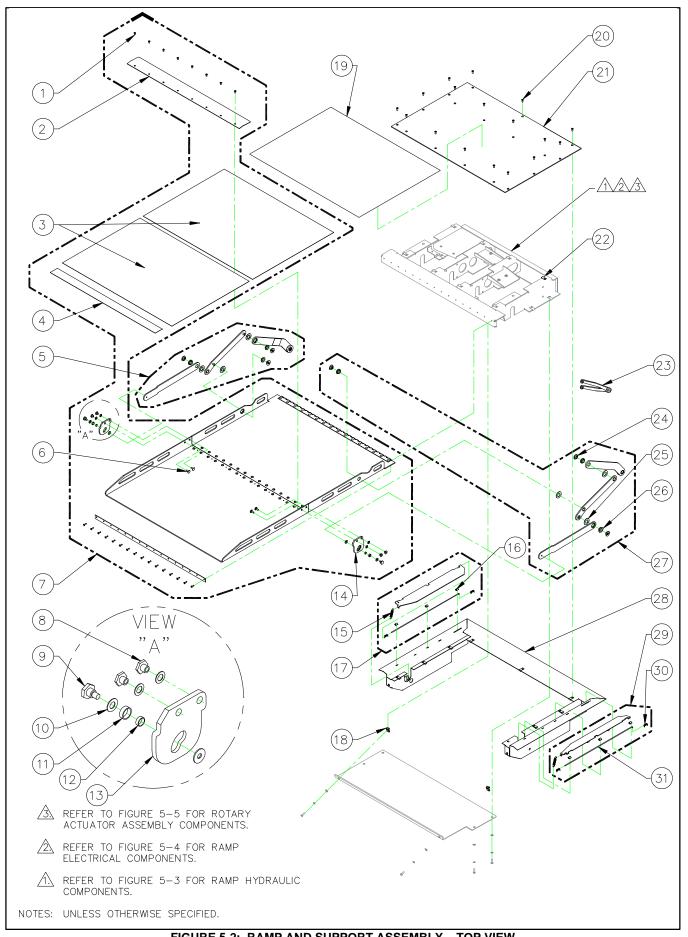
RAMP AND SUPPORT ASSEMBLY - TOP VIEW
